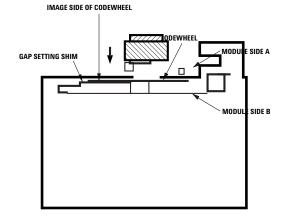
Alignment Tool is Used to Set Height of Codewheel.
